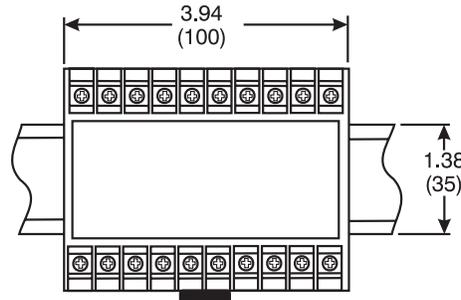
BE3 Case Size in Inches (millimeters) (Front View)
